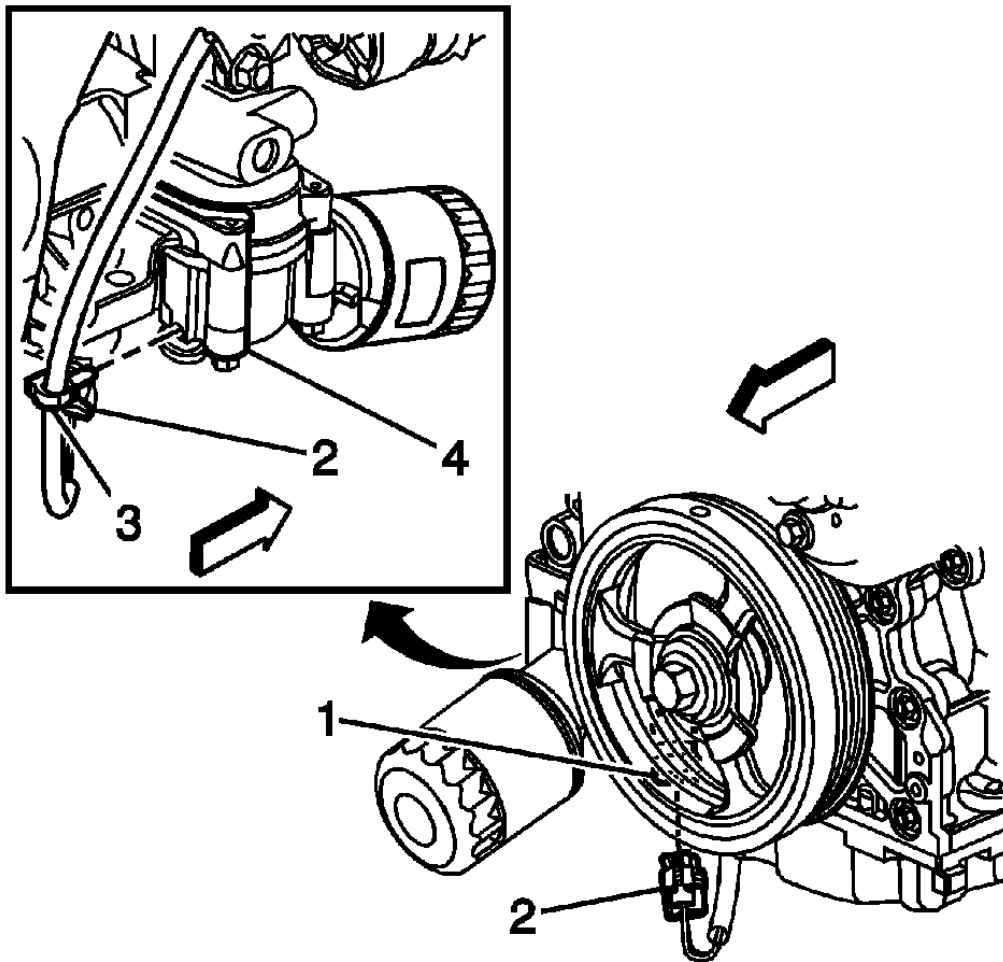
View Of Oil Pressure Switch Electrical Connector & Oil Filter Adapter Wiring Harness Retainer
